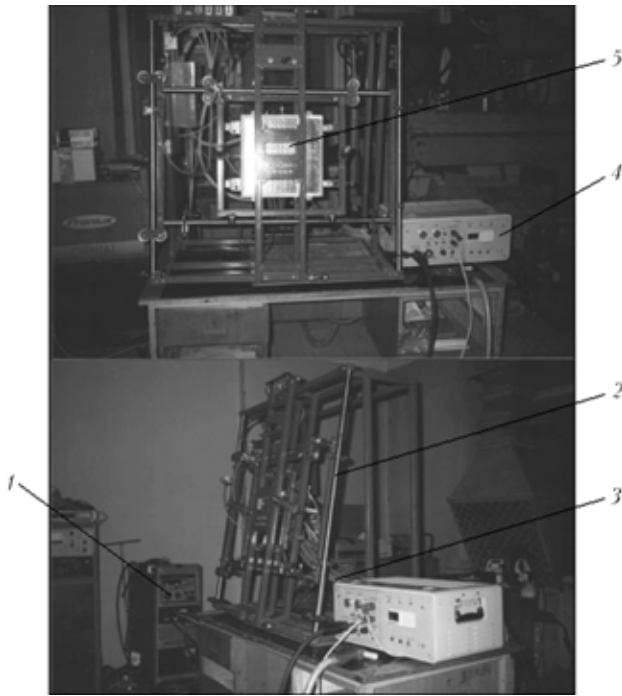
Laboratory unit for optimization of the technology of ASW of a three-layer panel with a cellular filler: 1 — welding current source; 2 — welding bench; 3 — connecting cables; 4 — welding cycle control module; 5 — frame with samples
